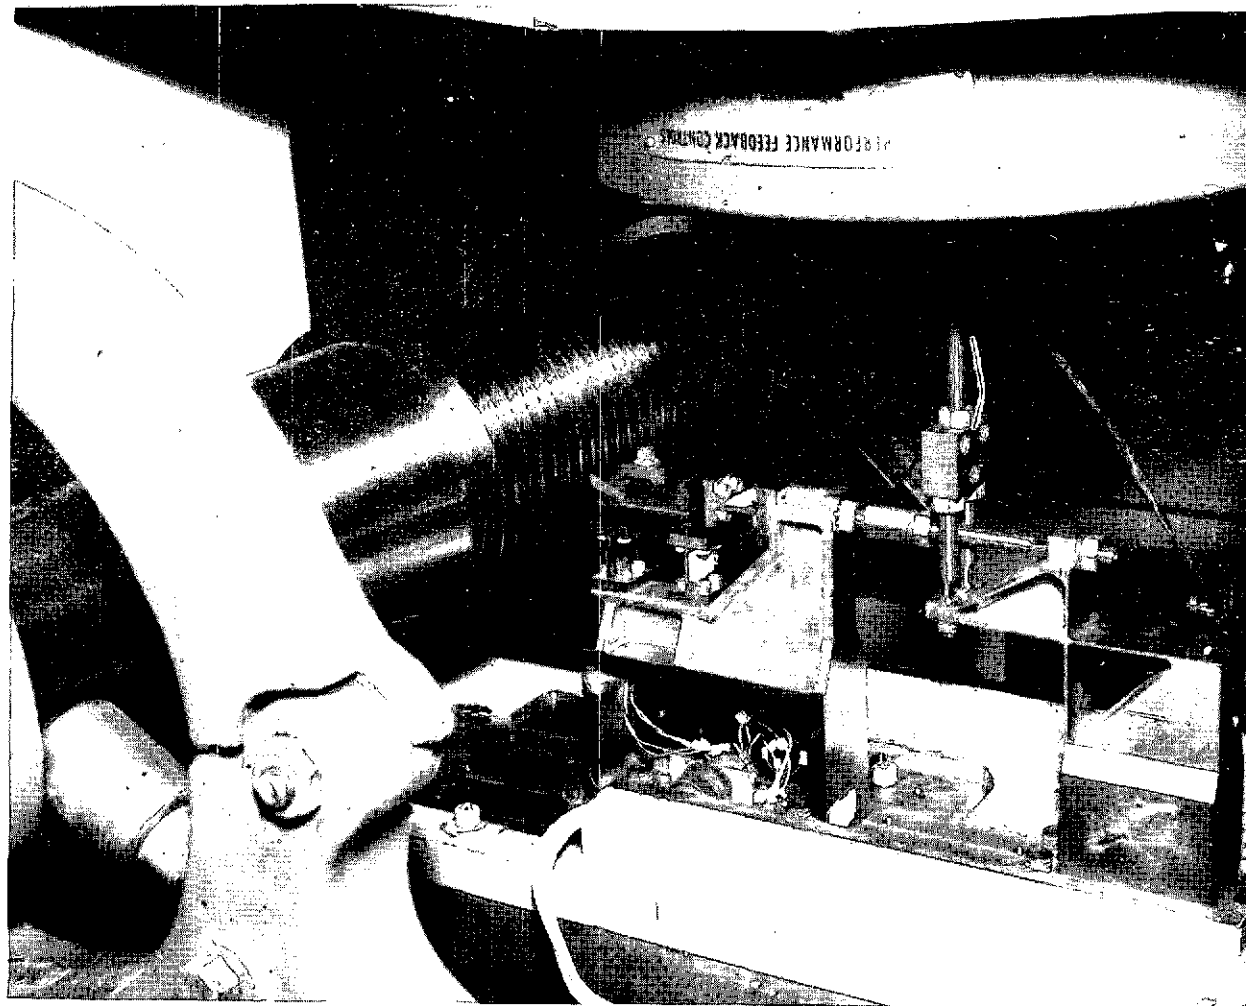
View of force dynamometer and flexible tooling showing completed assembly.
